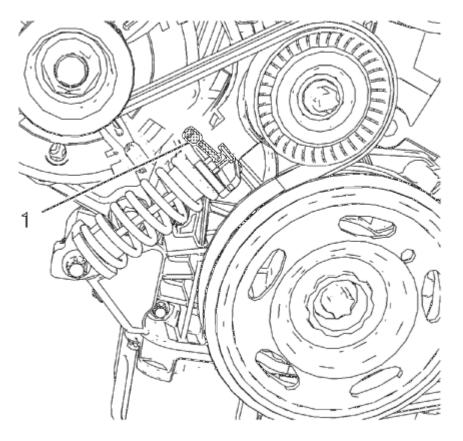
Holding Wrench And Drive Belt Tensioner Courtesy of GENERAL MOTORS COMPANY
